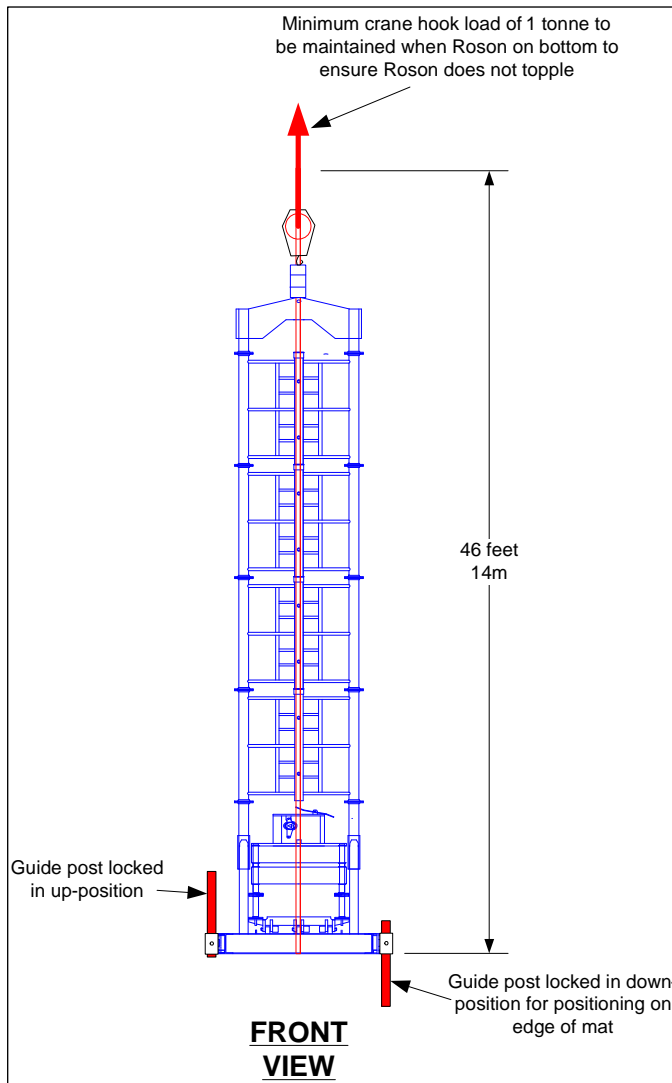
Roson Detail Showing Push Rod String in Center
